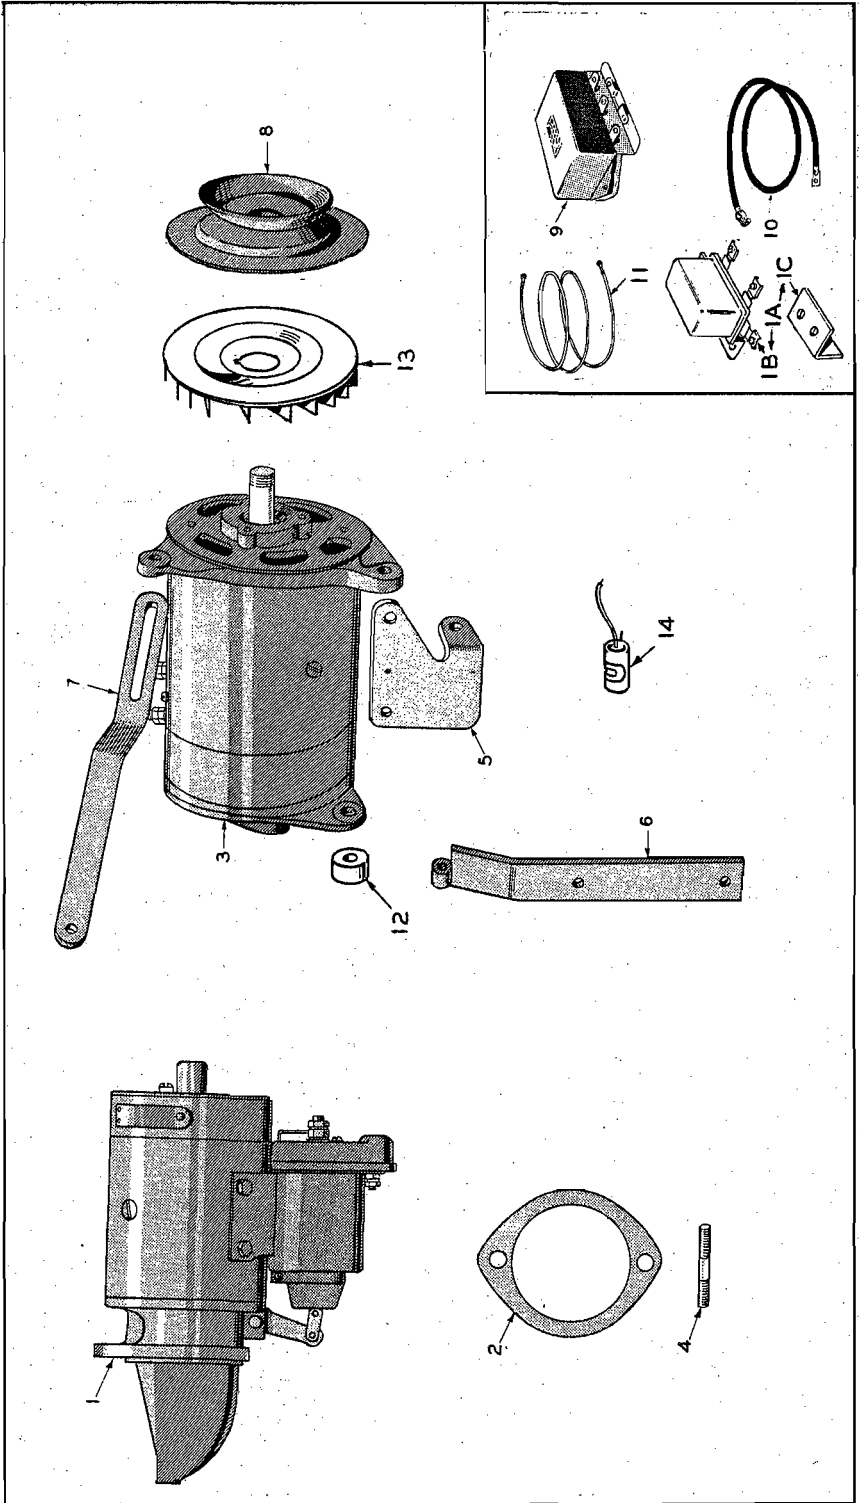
STARTING MOTOR & BATTERY CHARGING GENERATOR GROUP
